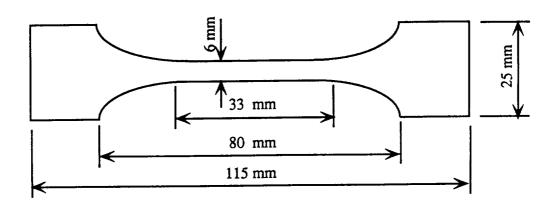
Dimensions of the tensile test specimen per ASTM standard D 638M-89.
